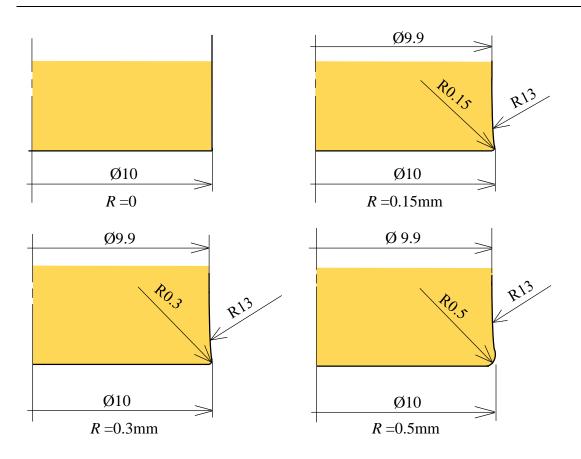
Punches used in small clearance punching of die-quenched steel sheet.
